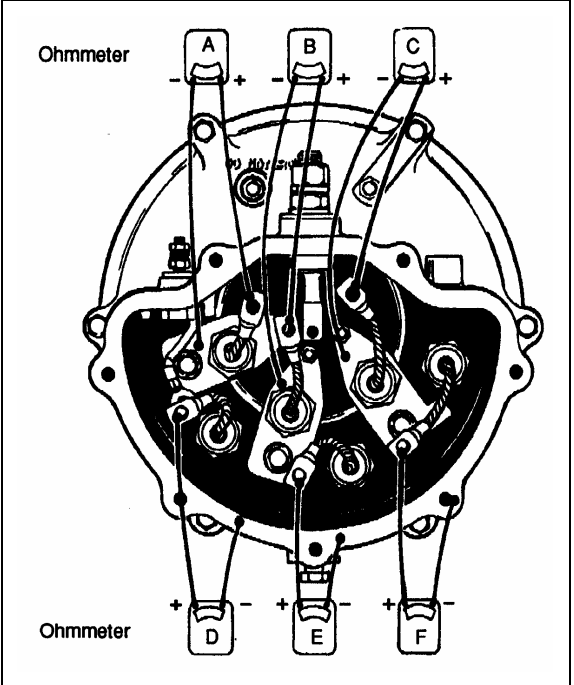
CHECKING DIODES WITH OHMMETER ON A TYPICAL OIL COOLED ALTERNATOR (END COVER REMOVED)
